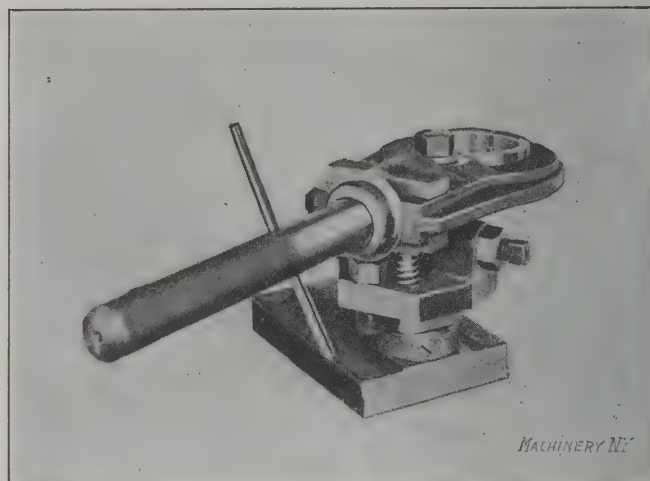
A Special Fixture for Cutting Oil Grooves in the Equalizing Gear Bushing
